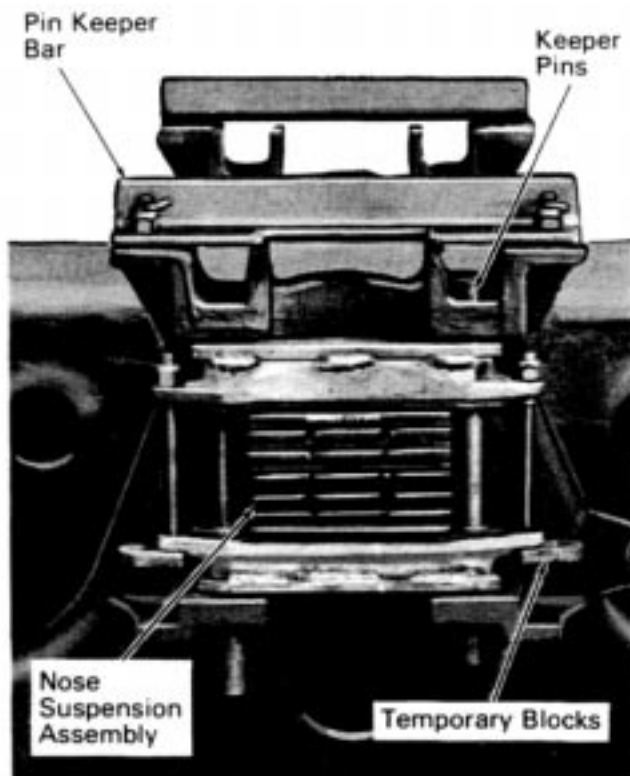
Traction Motor Nose Suspension Removal, Inverted View
